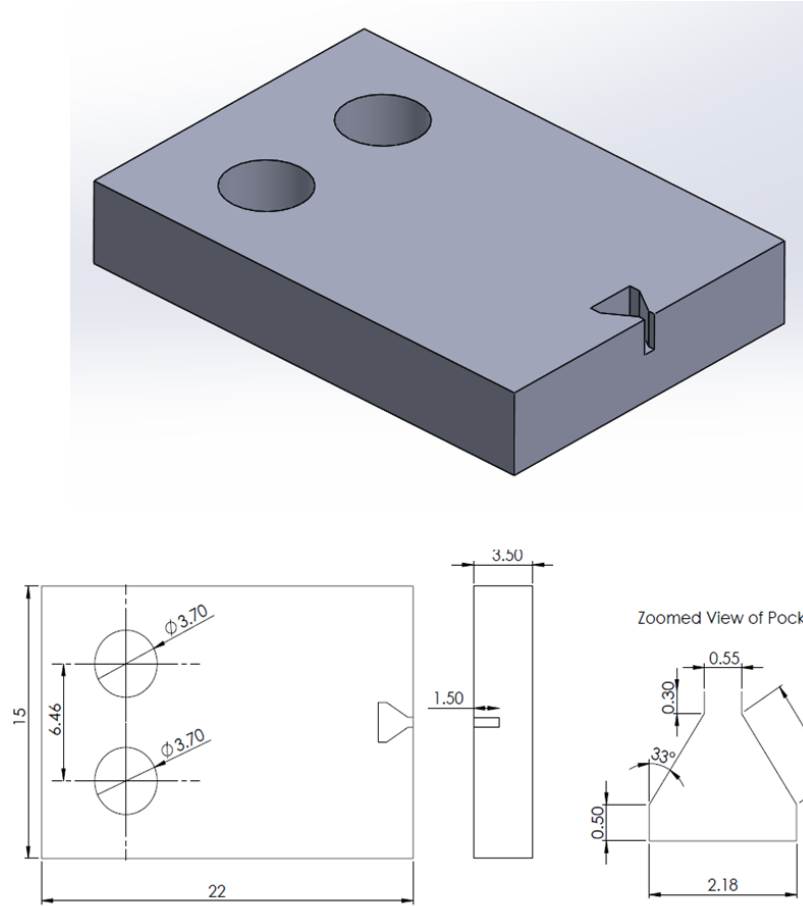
(a) Model of test grips for dogbone samples used in ex situ load frame and (b) drawing of test grip with dimensions labeled in mm.
